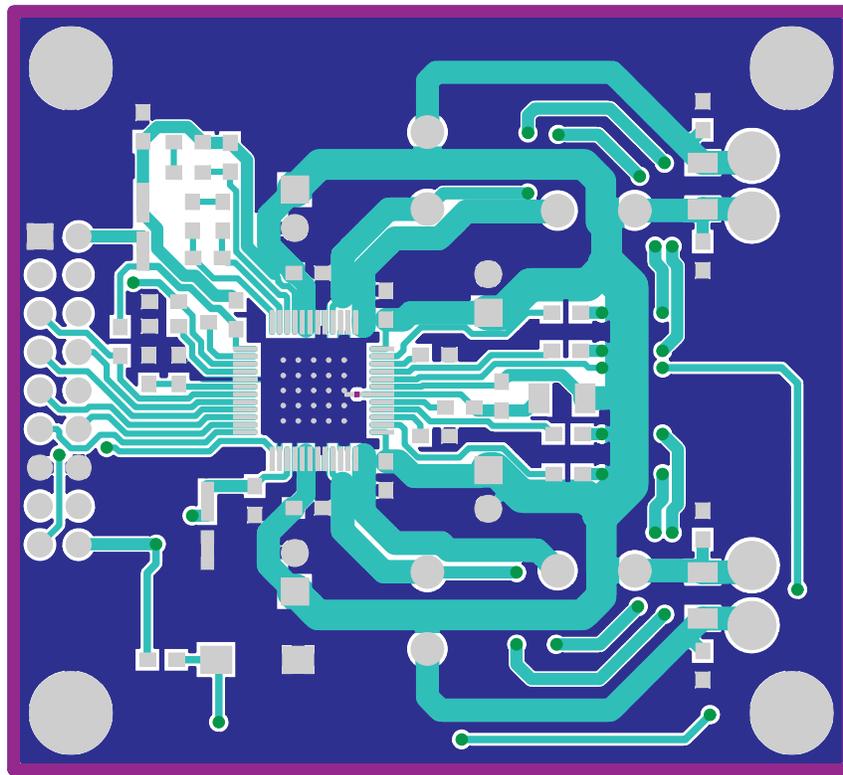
TAS5708(TAS5710)EVM Top Copper Assembly
